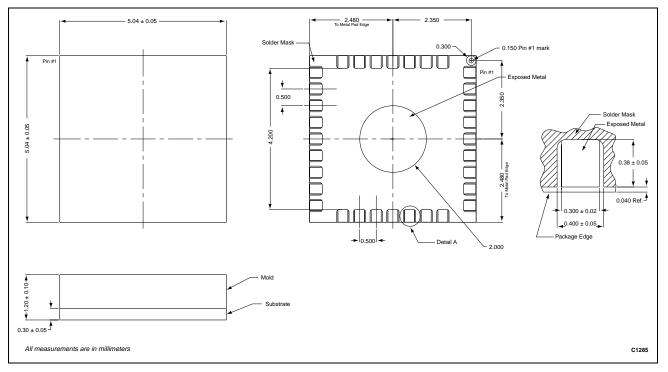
Rx ASIC Package Dimensions – 32-Pin LGA Package
